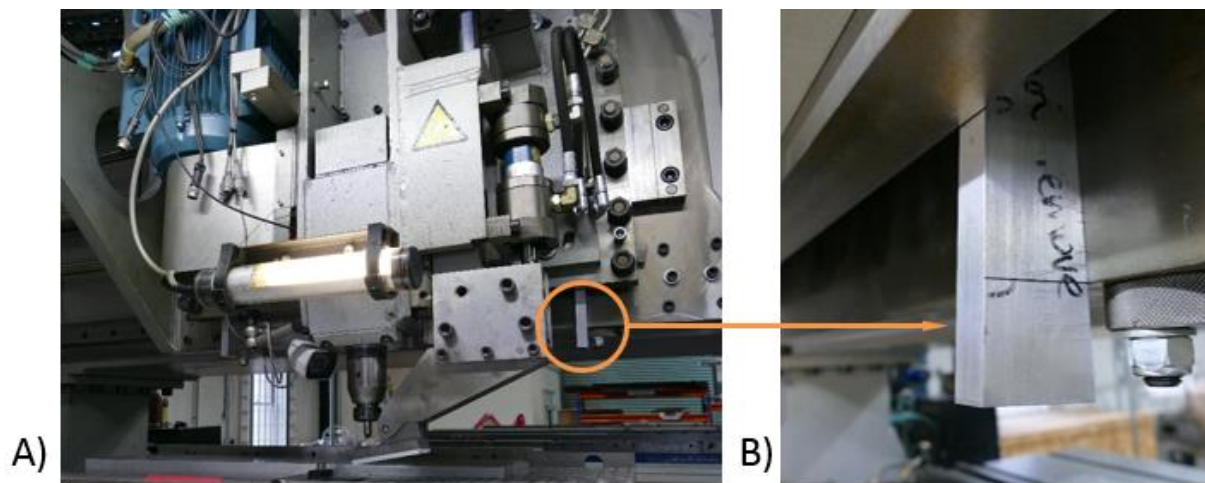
Tilting system used on the FW-28 ESAB SuperStir™ A) general view and B) detail of previous (Courtesy of TWI,Ltd).
